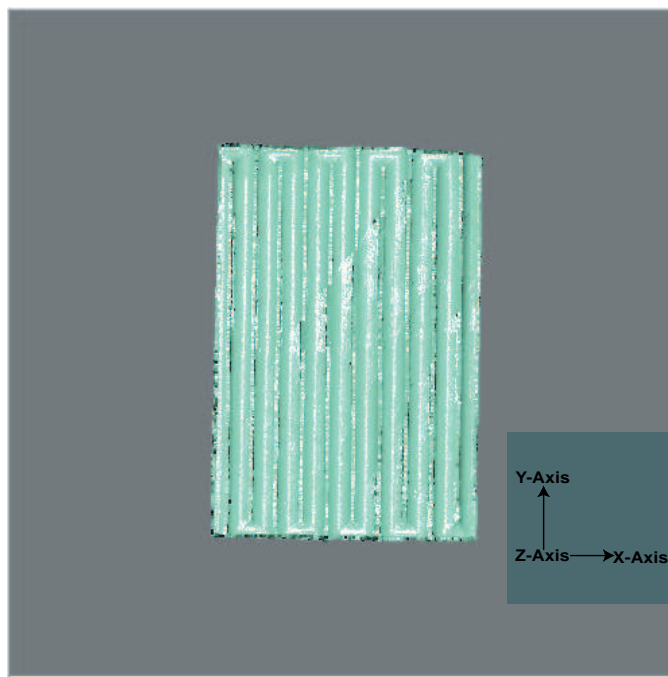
Machined part of example 1 with tolerance 0.05 inches
